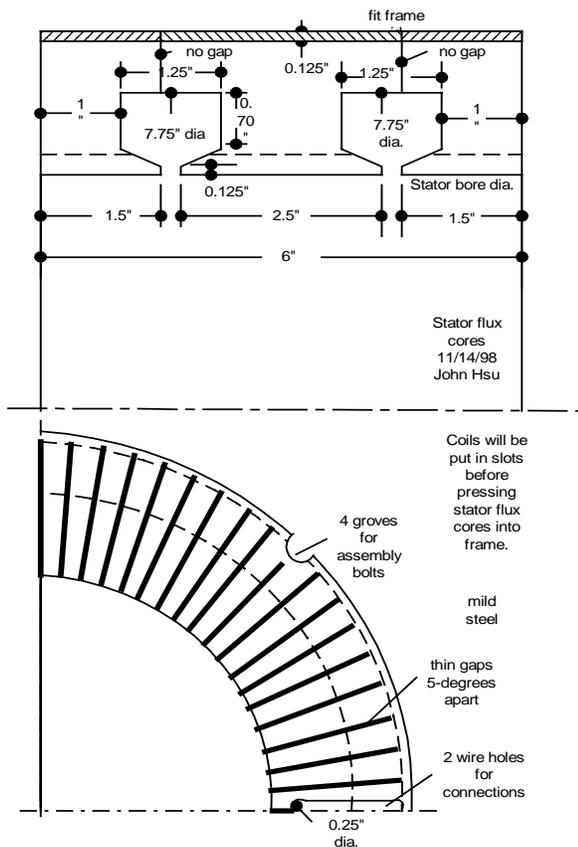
Solid stator core with slits for a HSU prototype machine.
